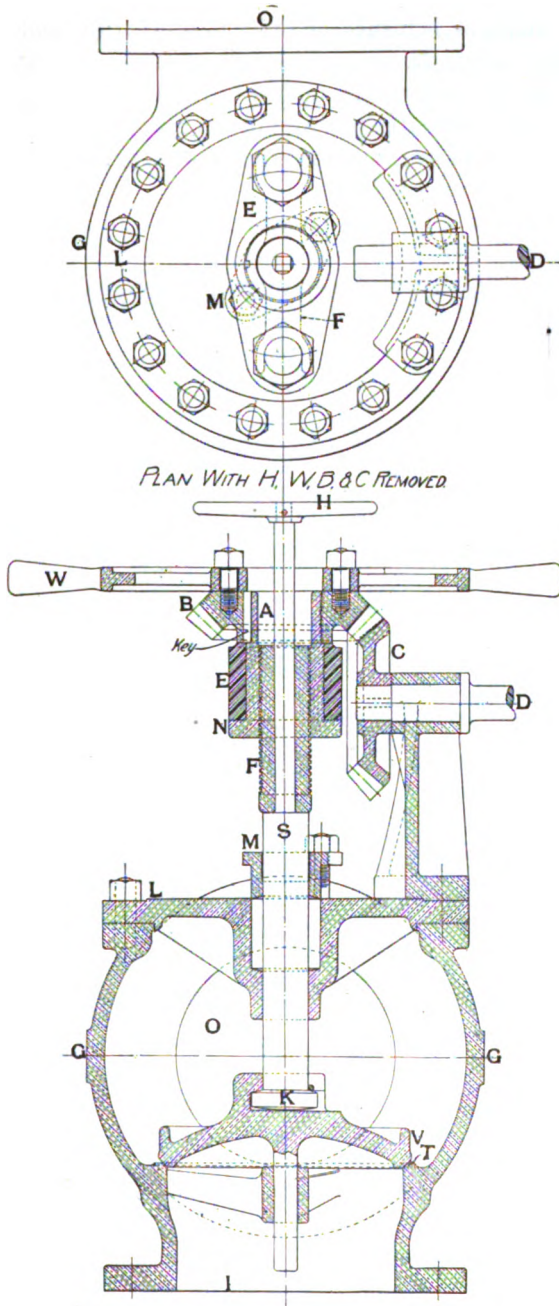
Self-Closing Stop Valve, Closing toward Boiler.
